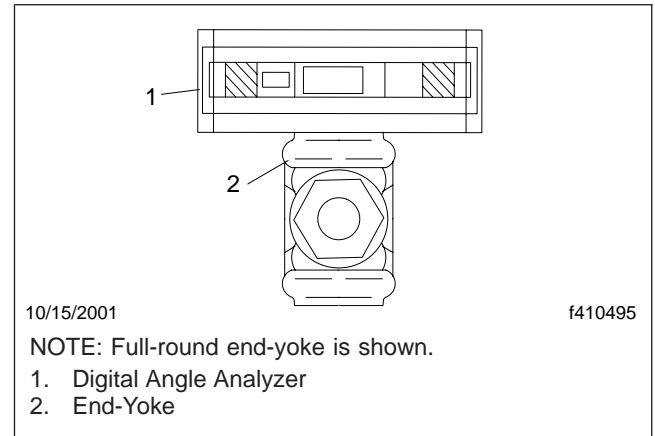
, Horizontal Positioning of Yoke Lug Machined Surface
